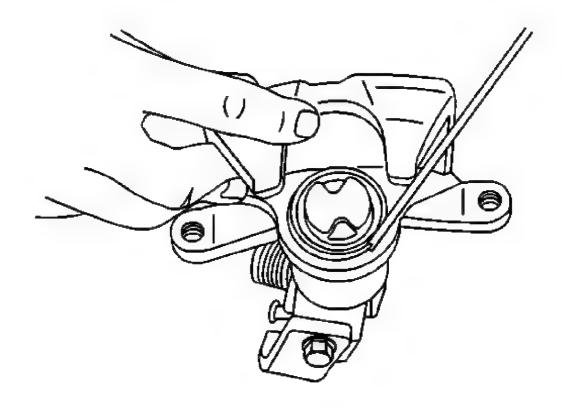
View Of Rear Brake Caliper Courtesy of GENERAL MOTORS CORP.
